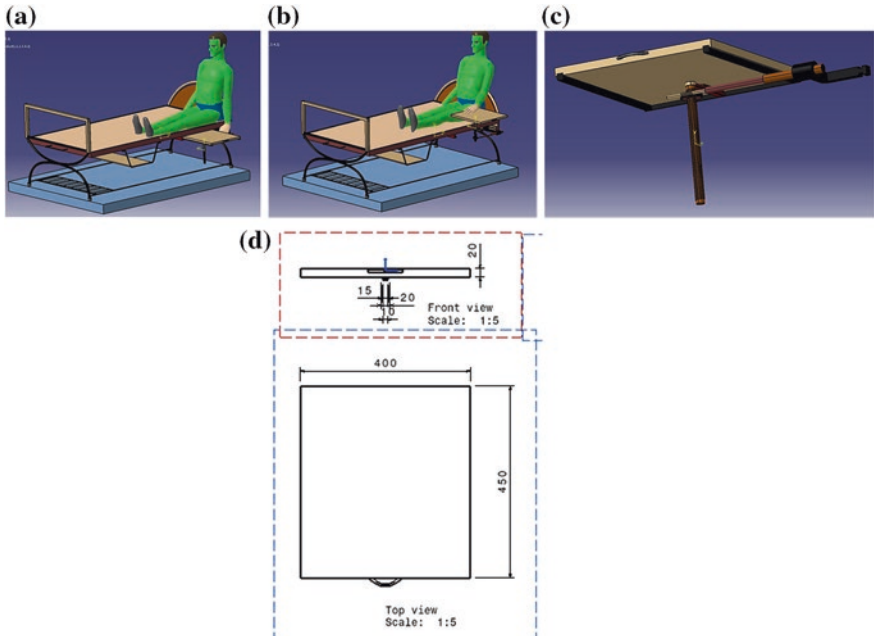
a, b Person using reading table. c, d Assembled table and its dimensions
